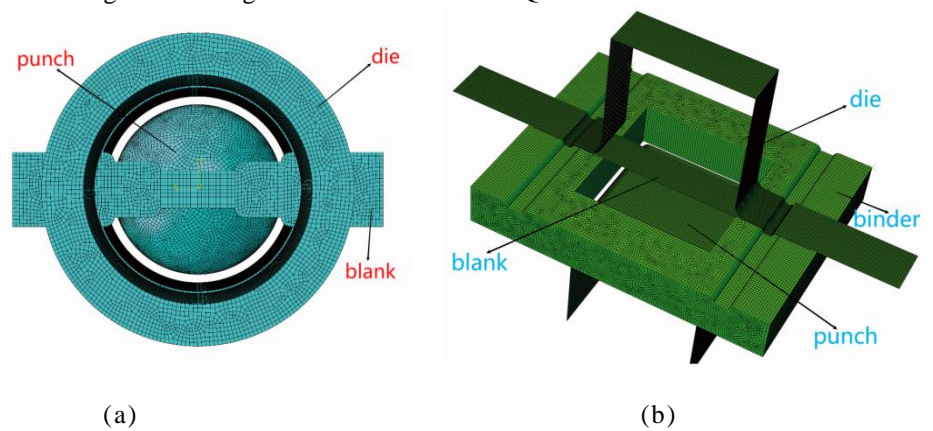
(a) Drawing of bulging die and sample and (b) Drawing of tensile bending test mould and sample
